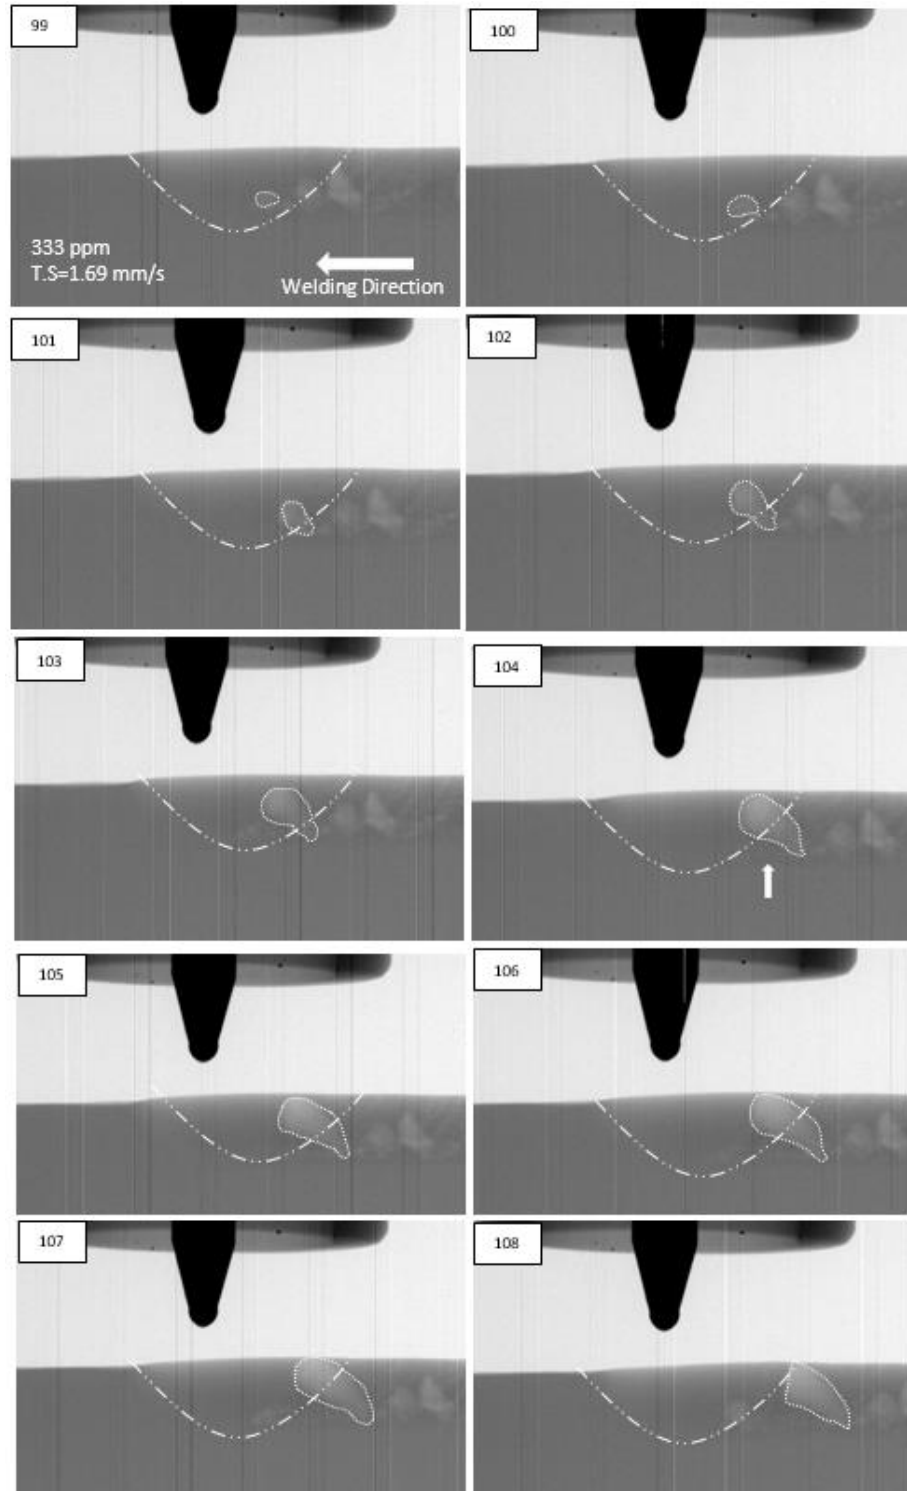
Alloy 1100 welded sample using 333 ppm shielding gas hydrogen at travel speed of 1.69 mm/s, shows pore formation at the bottom of the weld pool and elongated pore growth.
